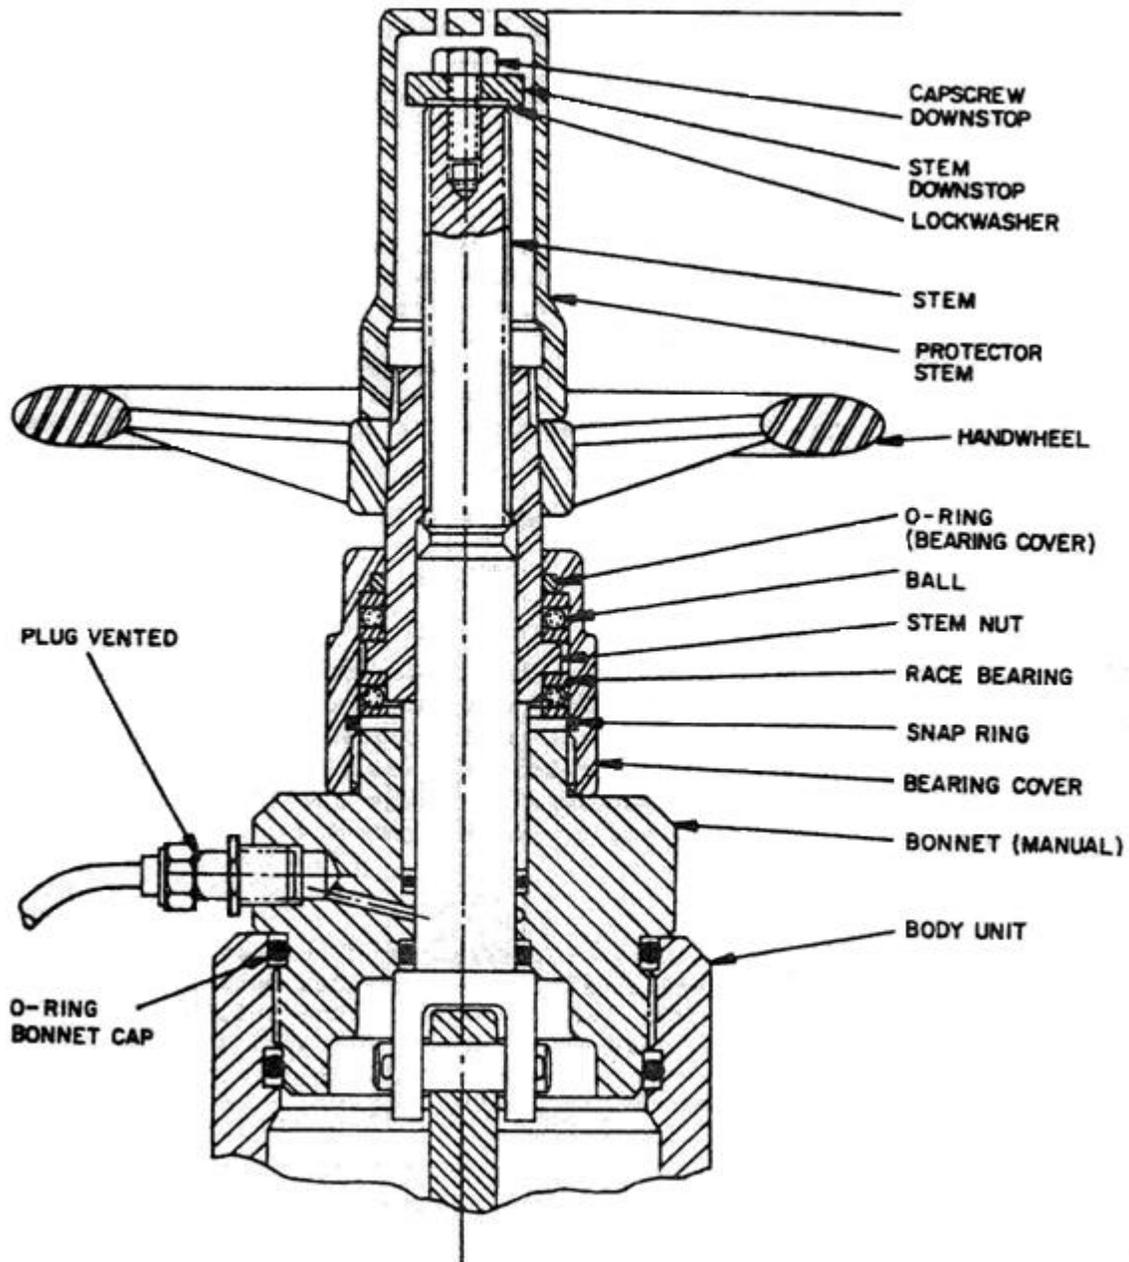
Manual Operating Mechanism Gate Valve (Grove Seal O-Ring)
